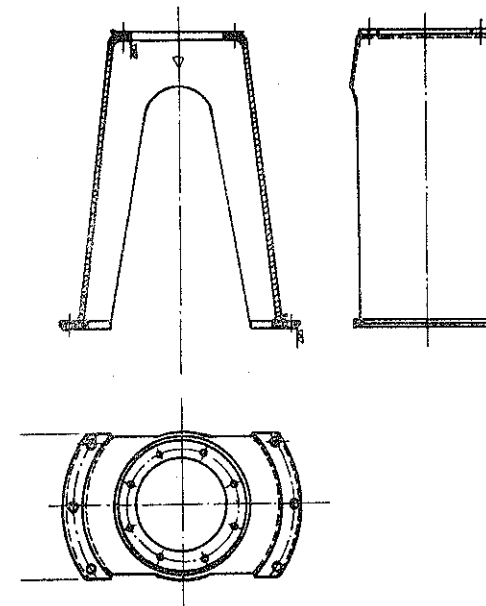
Stool for supporting drive system (Welded construction)
